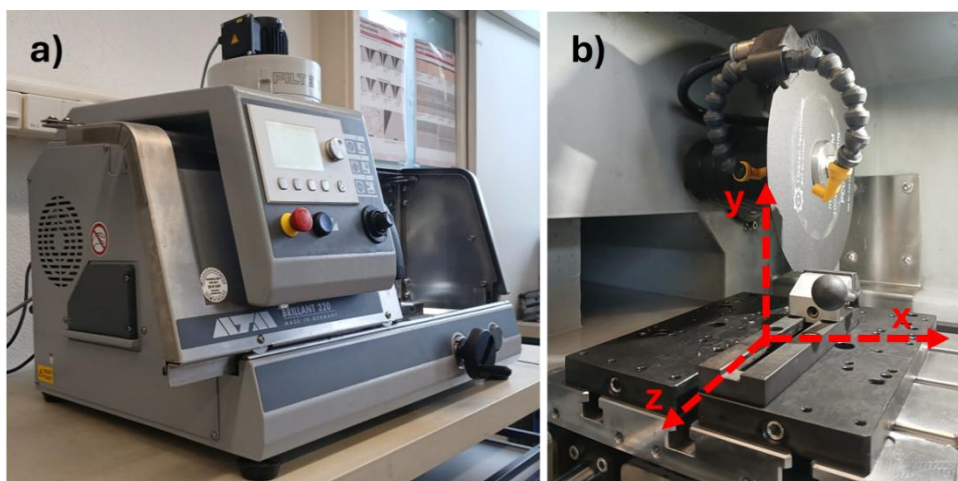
a: Precision cut off machine, b: holder sample, cutting axis, and diamond blade (at Laboratory of joining technologies and corrosion EMPA Dübendorf - CH).
